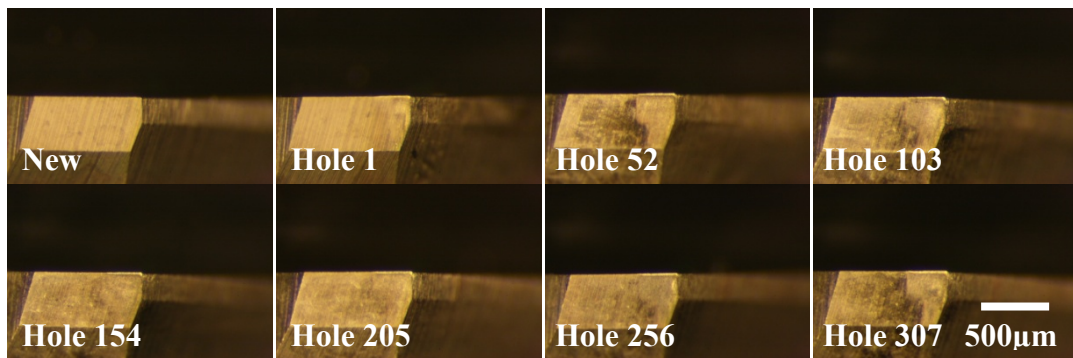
Tool wear micrographs of uncoated carbide reamer under 70bar through-hole cutting fluid, 96m/min cutting speed (Test 2)
